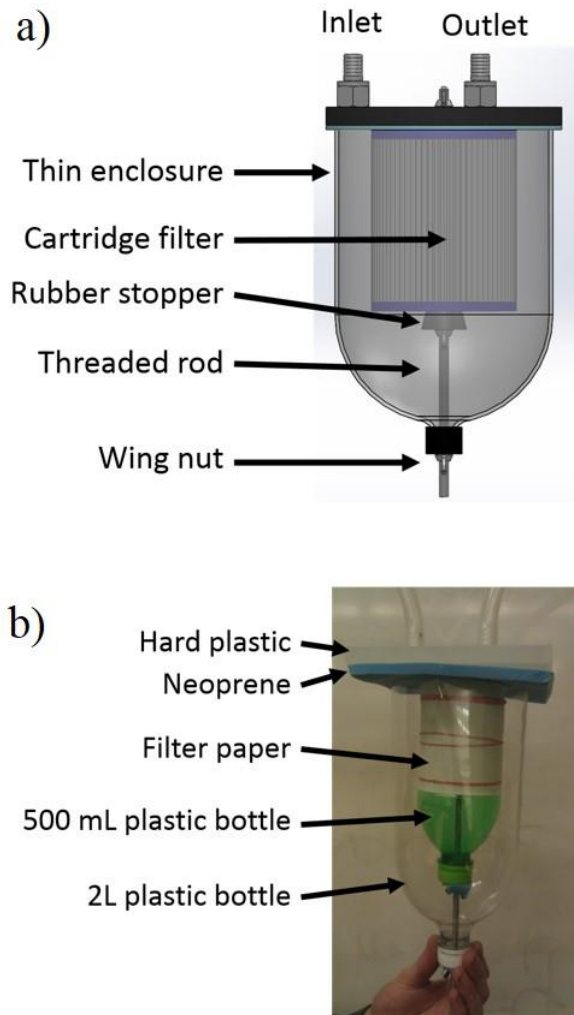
a) The CAD and b) concept prototype for an alternative housing geometry that fixtures and seals both the filter and external housing via a center mounted threaded rod.
